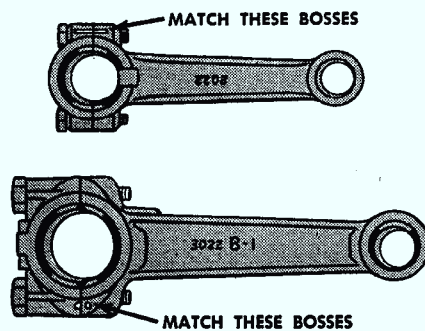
When assembling cap to connecting rod, be sure that embossments on rod and cap are aligned as shown.
